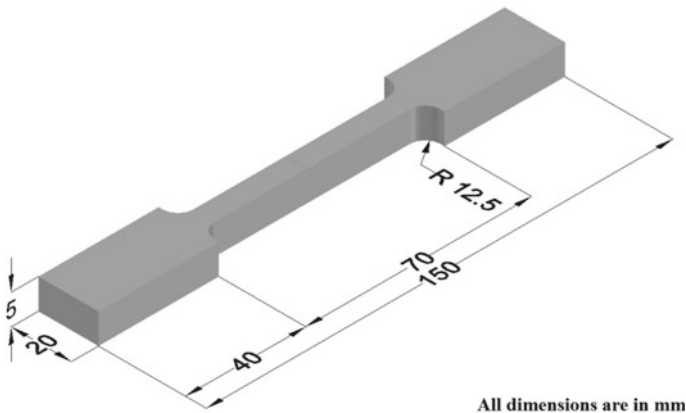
Tensile specimen dimensions (ASTM E8M-04)
